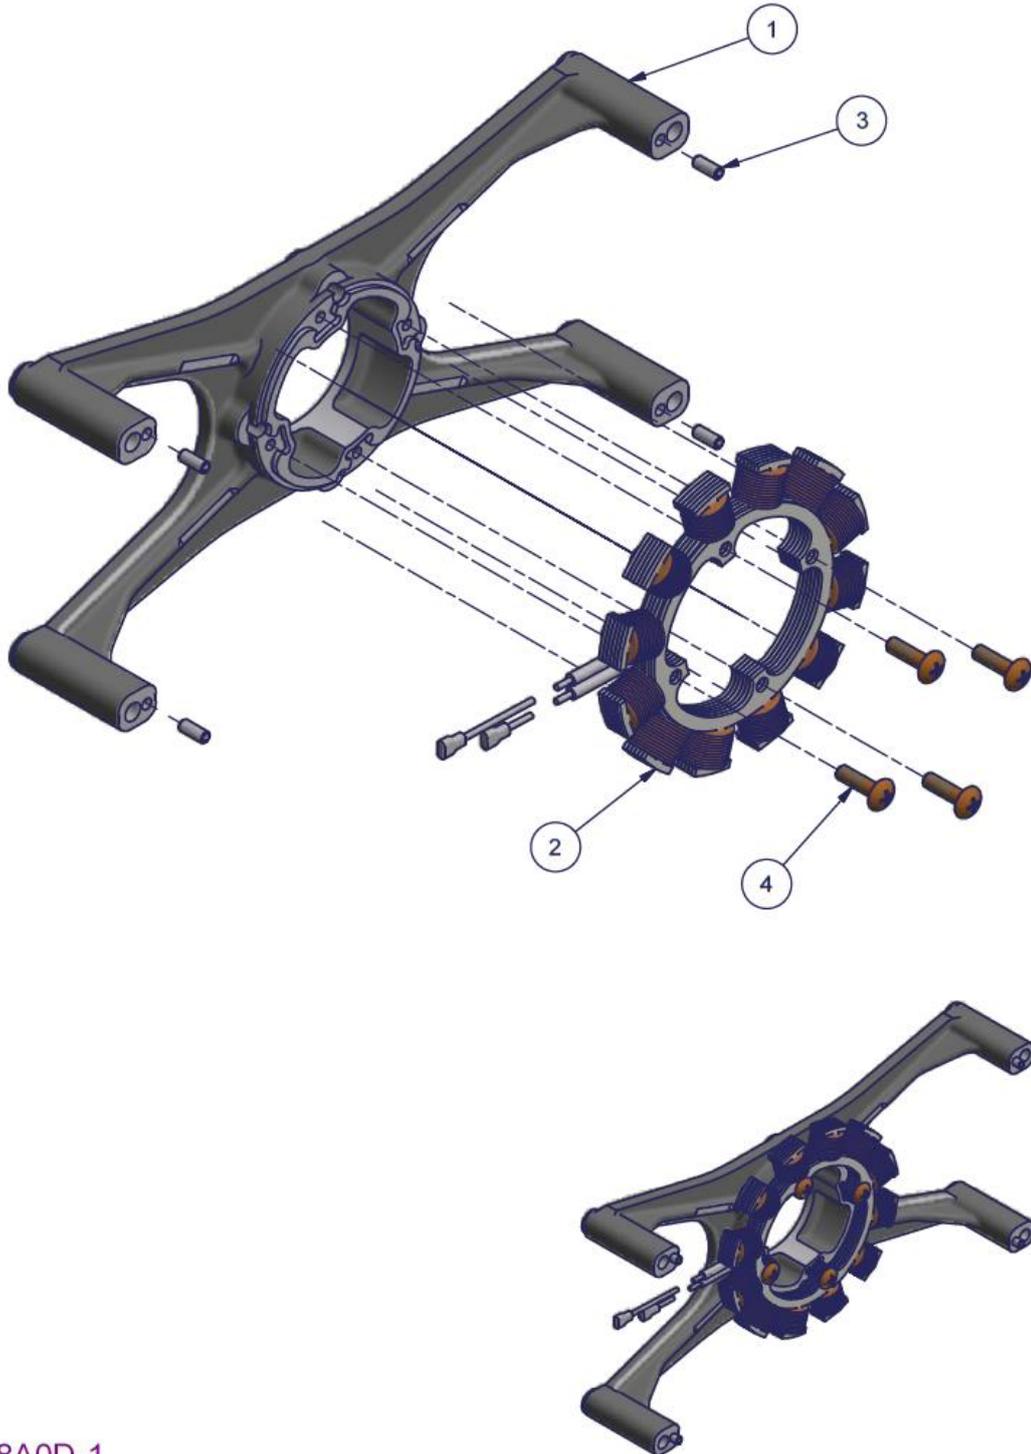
2200/3300 alternator stator subassembly – Parts list
